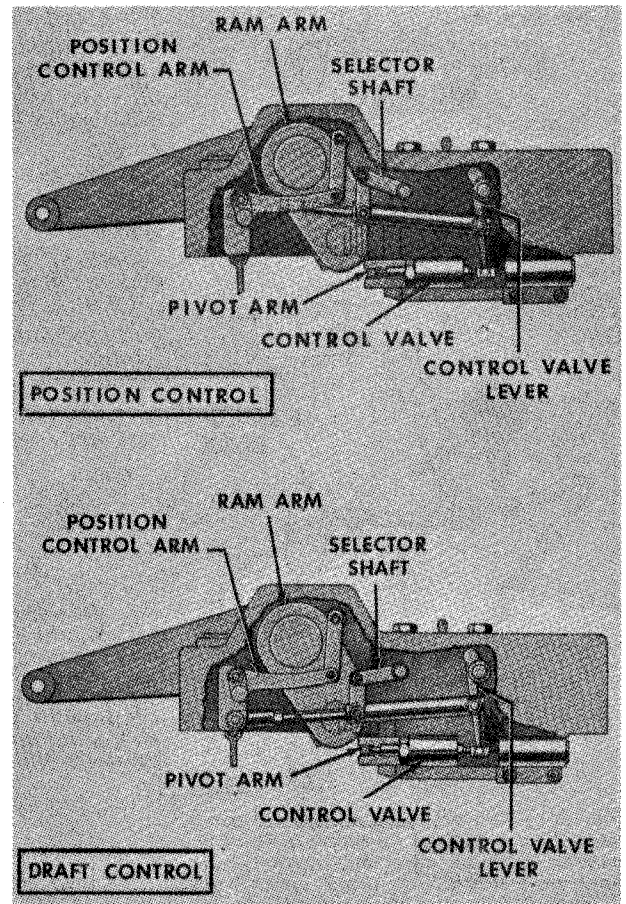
Selector lever (S—Fig. 209) controls position of selector shaft which moves rear end of actuating rod attached to control valve lever to position control (top view) or draft control (bottom view) position in position control arm. Also, detent positions between full position control and full draft control provide varying degrees of draft control. Refer to exploded view of detent mechanism in Fig. 223.
